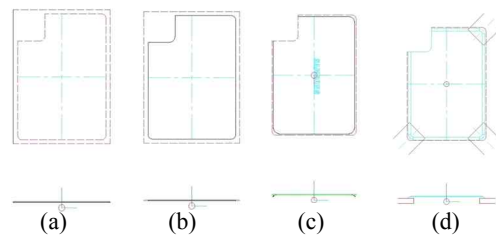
Initial layout design of SSD case: (a) shearing; (b) notching; (c) bending; (d) cam
